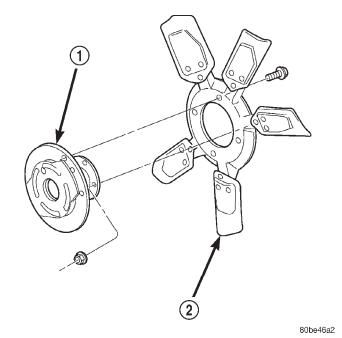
Viscous Fan Drive and Fan Blade Assembly
